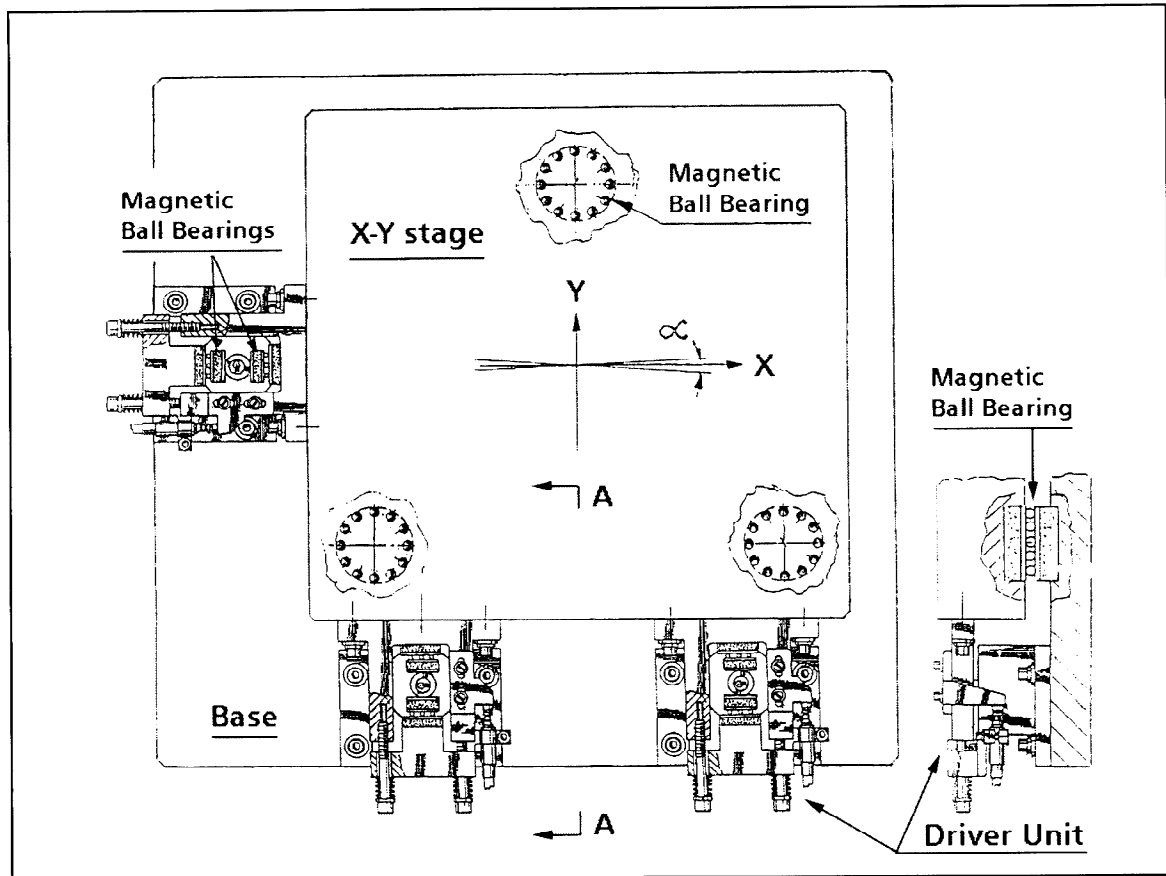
Sketch of an Ultra-high X-Y Stage and Position Driver Units, both of which incorporate magnetic ball bearings [12]
